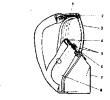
MF10-03-01 Mask Sub-Assembly
